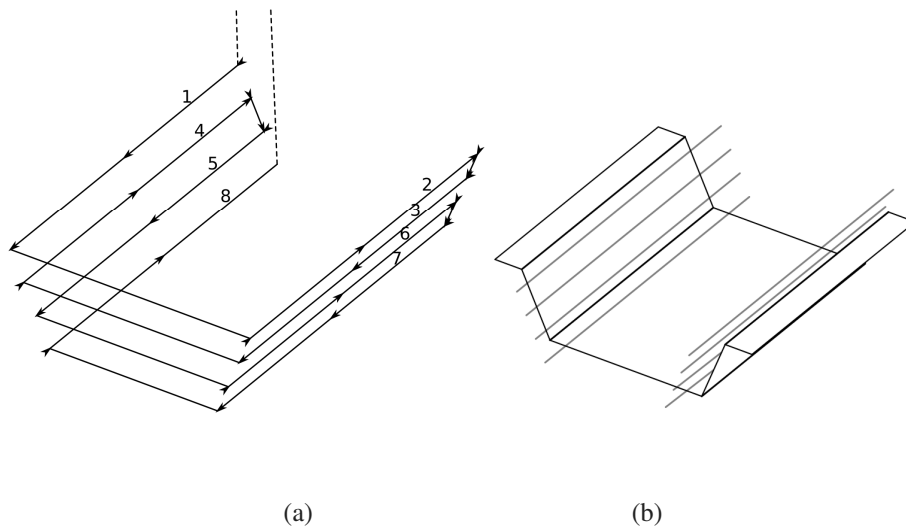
Toolpath strategy for tunnel shaped parts illustrating (a) movements of tool between passes 1-8 (b) length of tool movements on the part geometry
